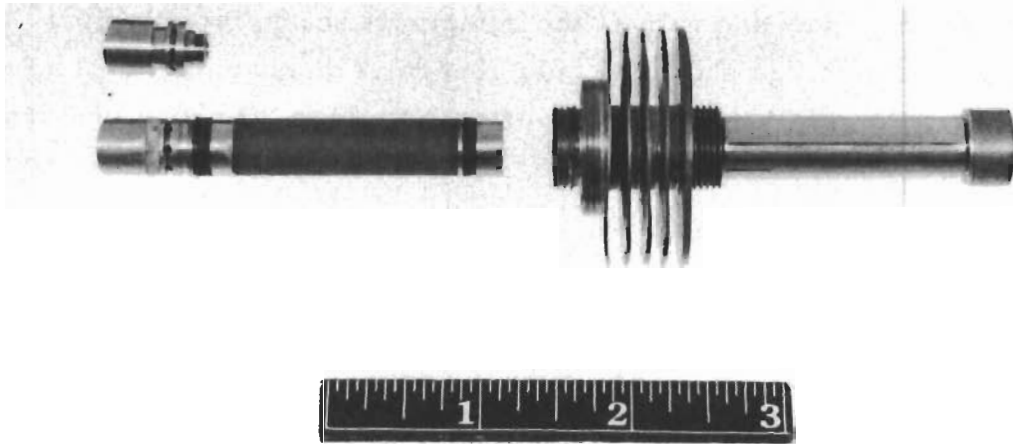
Cold displacer - cold cylinder assemblies (HAC photo 4R02916)
